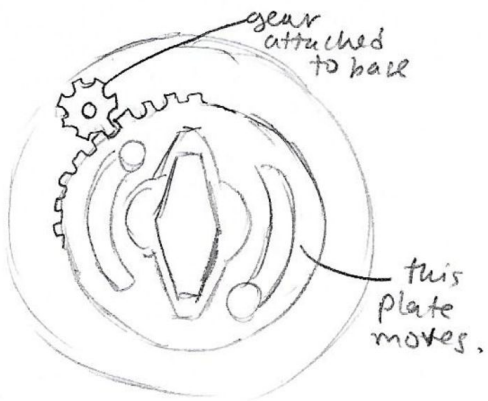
An early design using gears. The slots and pins on either side would hold the center piece
